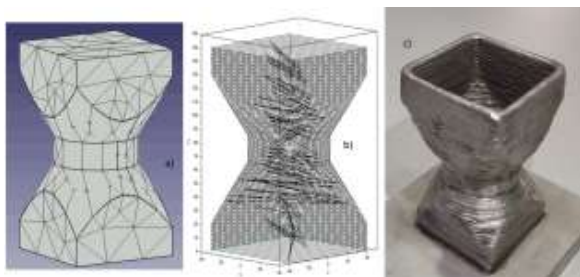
Example of hollow parts manufactured by WAAM (FRONIUS CMT mode), a) STL file, b) Robot trajectories from slicing, c) Printed part
